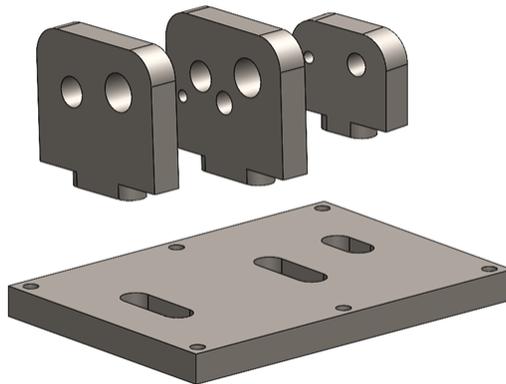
Slot and Tab Fixture of the Cap End Bracket
